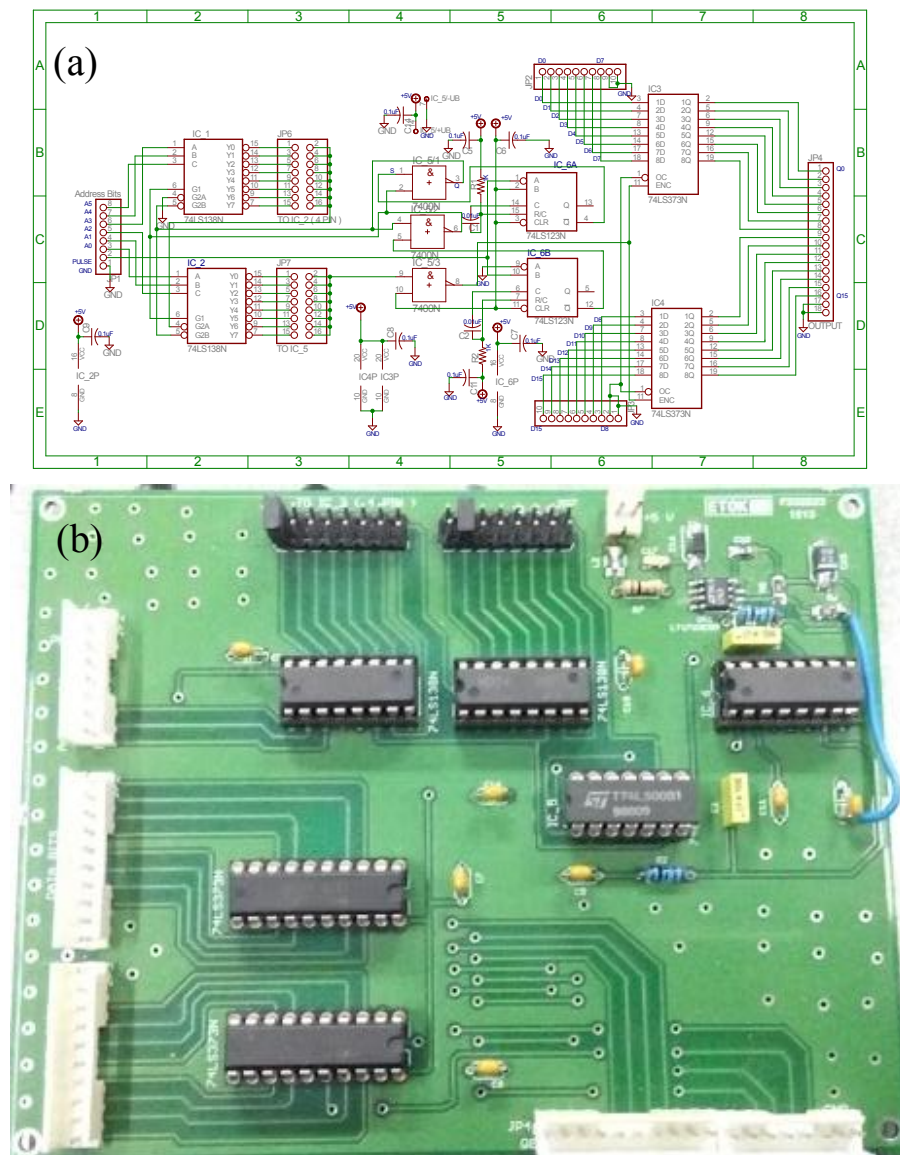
(a) Schematic of DACM which is designed in Eagle v6.4 and (b) Populated PCB board.
